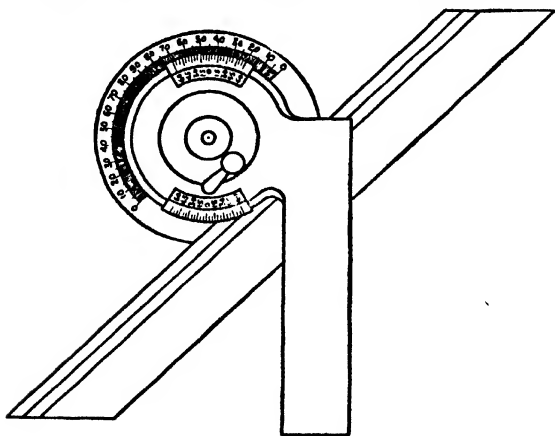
Bevel Protractor with Vernier Scale Attachment.
